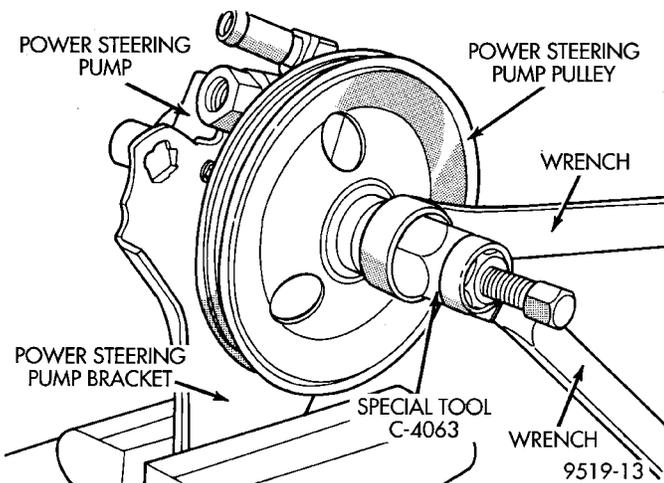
Pulley Installation On Power Steering Pump Shaft
